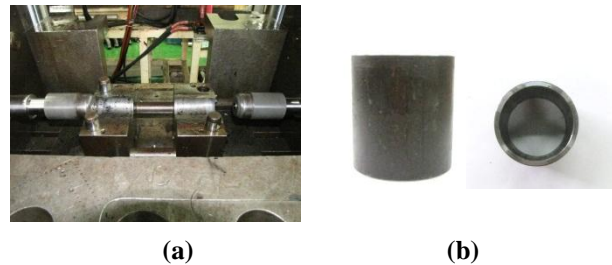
Die set for free bulging test; (a) die, (b) ring
